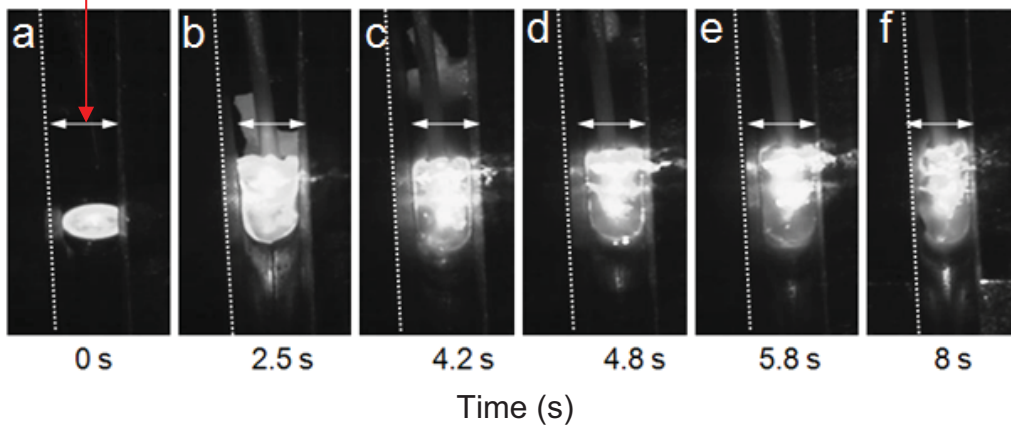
Image capture of groove deformation during welding.
